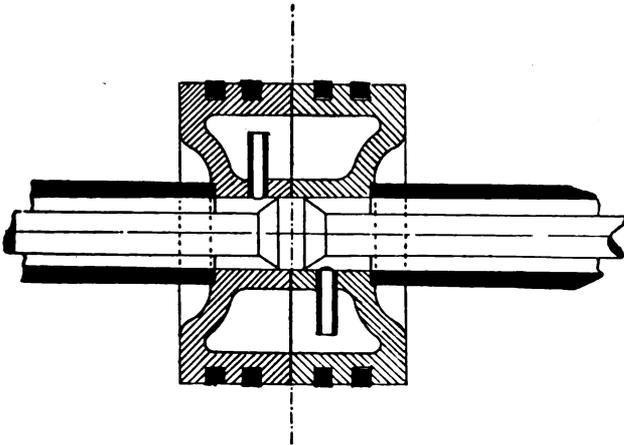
Snow Steam Pump Works Piston and Rod.
